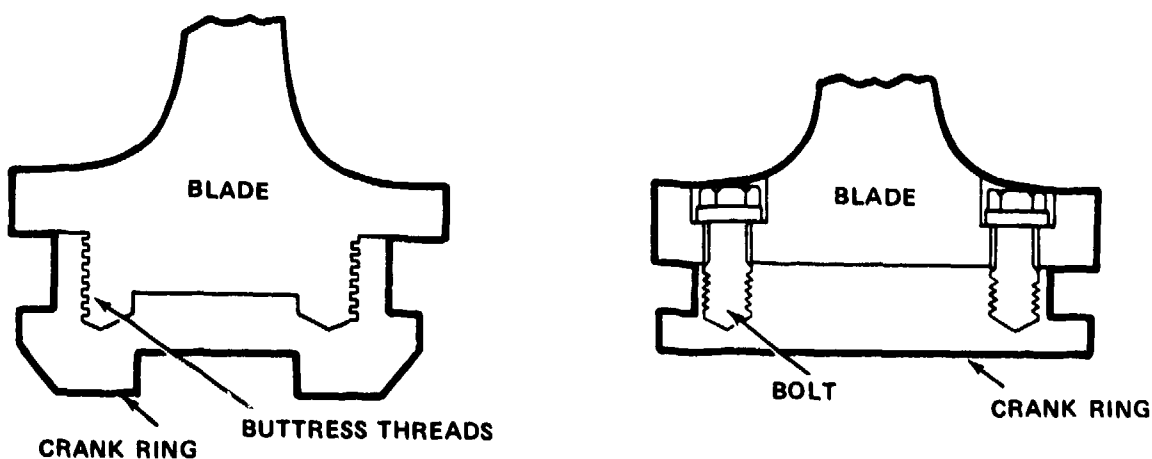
Two Methods of Attaching Blade to Blade Carrier
